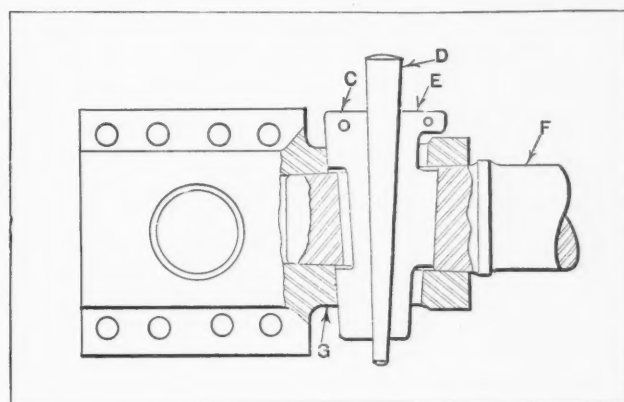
Piston-rod Extractor for Cross-heads having Draw Key Slot
